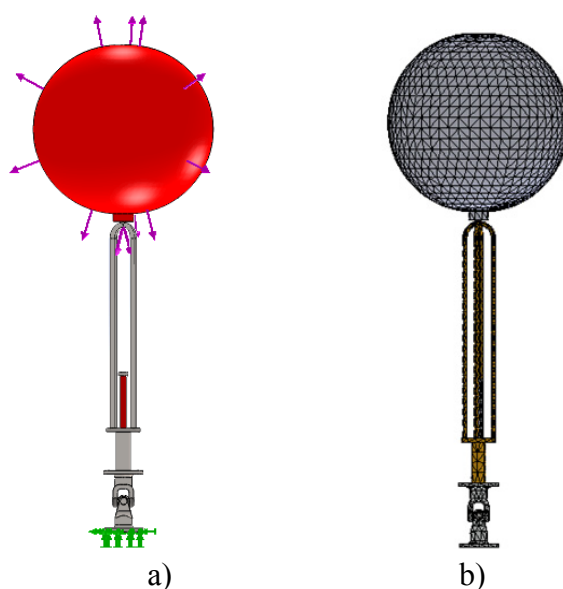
a) 3D CAD model with boundary and applied load conditions, retracted position of hydraulic cylinder piston rod and b) Mesh geometry of finite element model.
